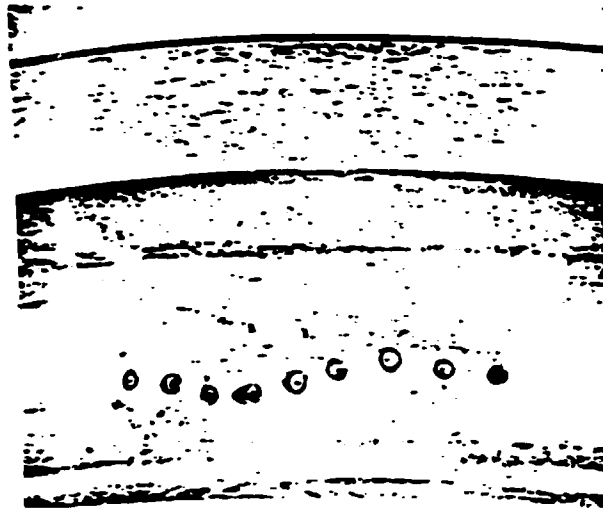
Running surface of the inner ring of a ball bearing with crater-shaped pits caused by arc-over.
